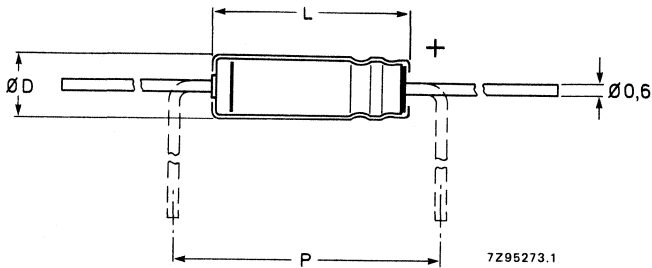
Style 1; see Table 1a for dimensions D, L and P.
